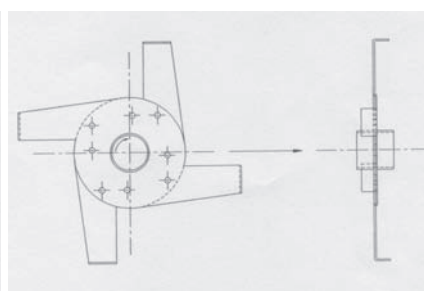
Arrangement of blades fixed to the disk of the shaft
